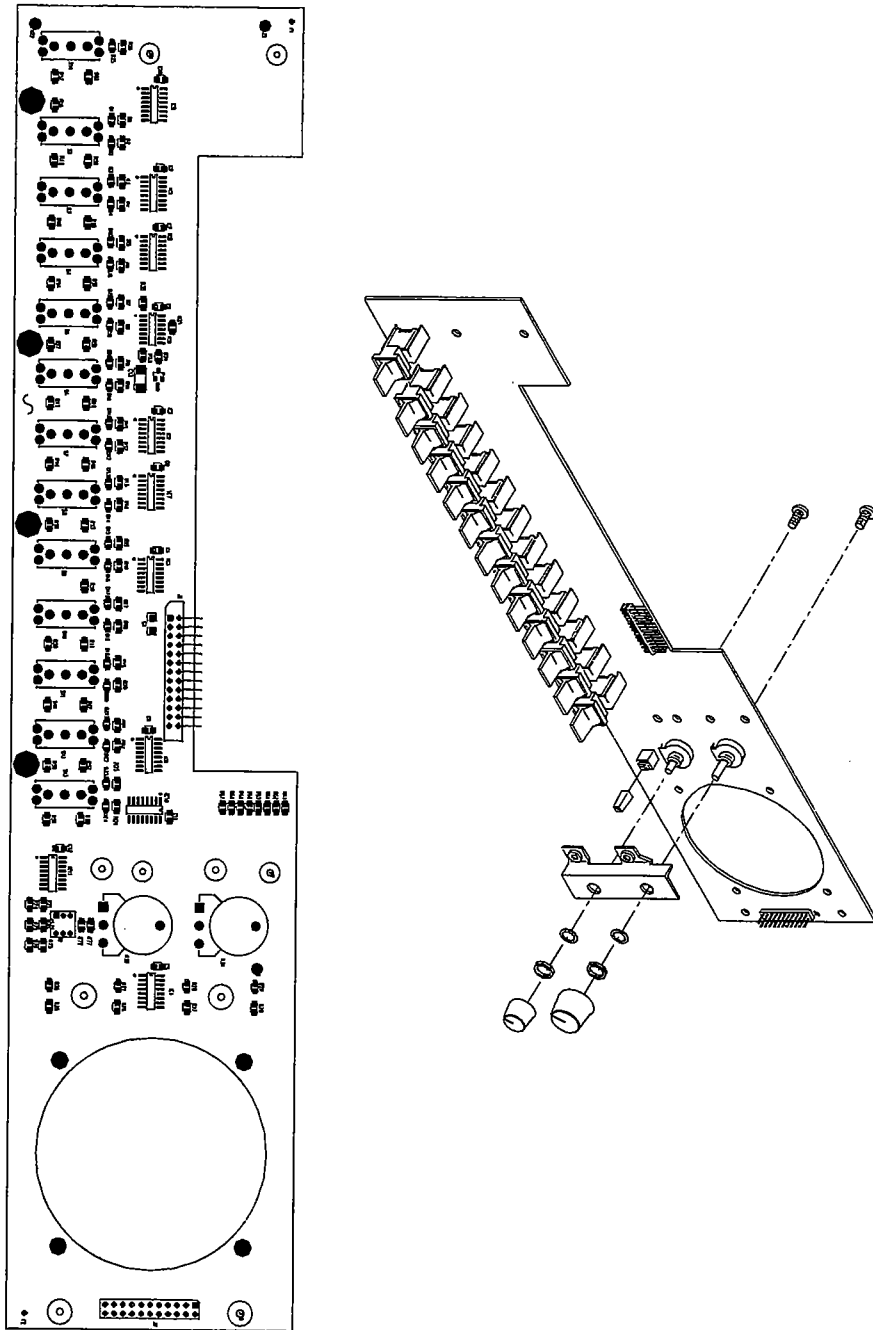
Assembly Drawing—ICS-2003 Front Panel PCB Rev. B
